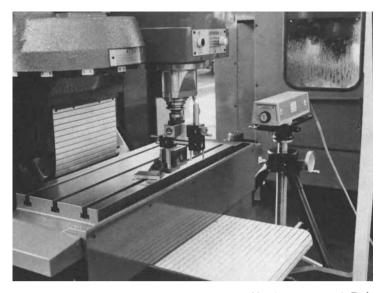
The final test area, prior to alignment testing (laser calibration assessment). Each machine tool is run continuously to check both electrical and mechanical performance before acceptance. [Courtesy of Bridgeport Machine Tools.]
